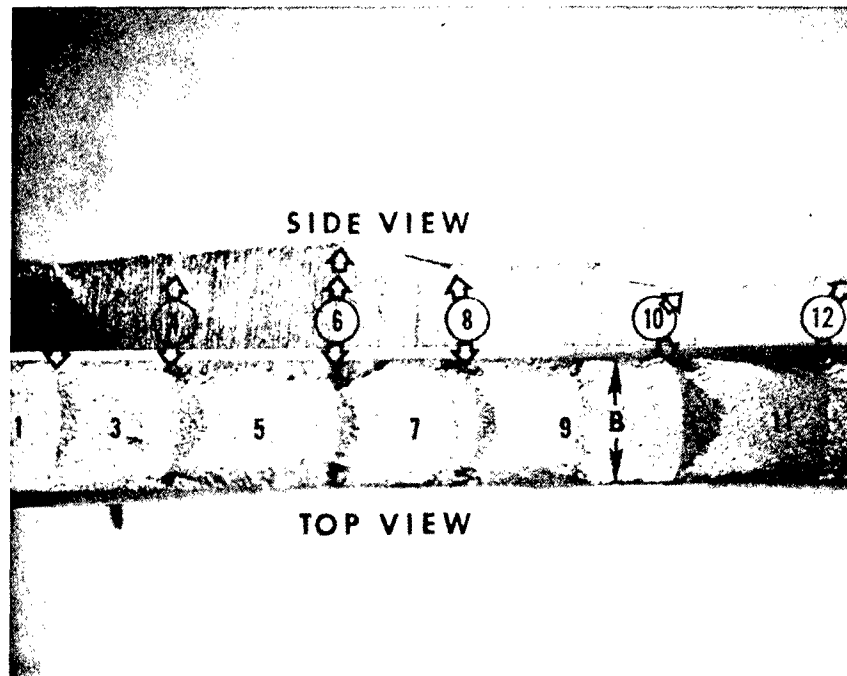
Macrophotograph of Fracture Surface of Low  $K_R$  Test Specimen
